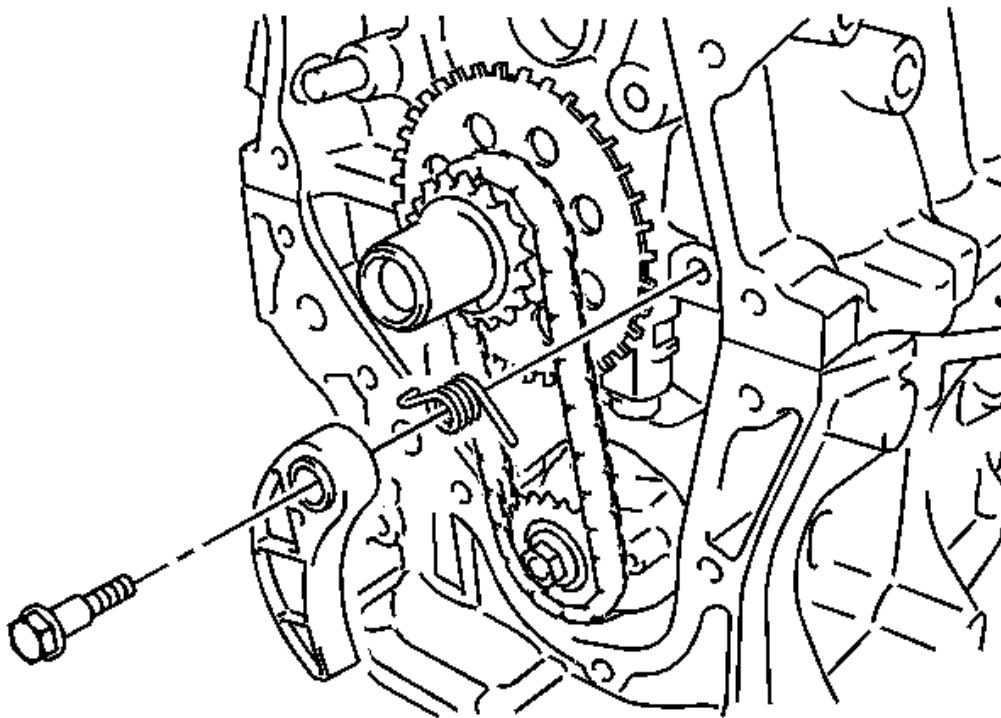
View Of Chain Tensioner Plate, Spring & Bolt
